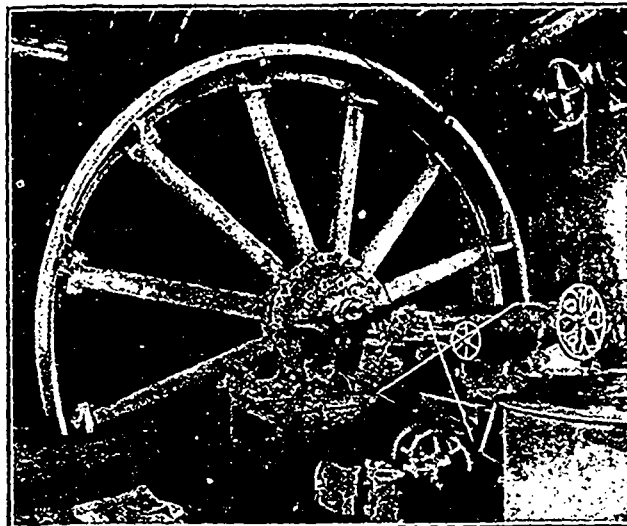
LAURIE ENGINE & MACHINE CO'S THIRTY FOOT ROPE PULLEY IN LATHE.
